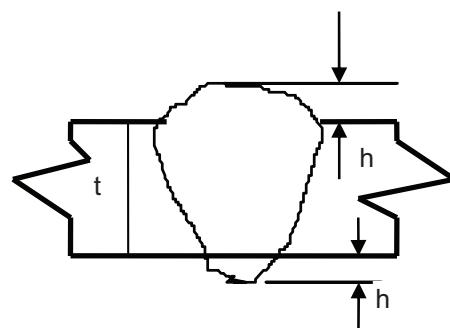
Reinforcement or internal protrusion of butt weld
